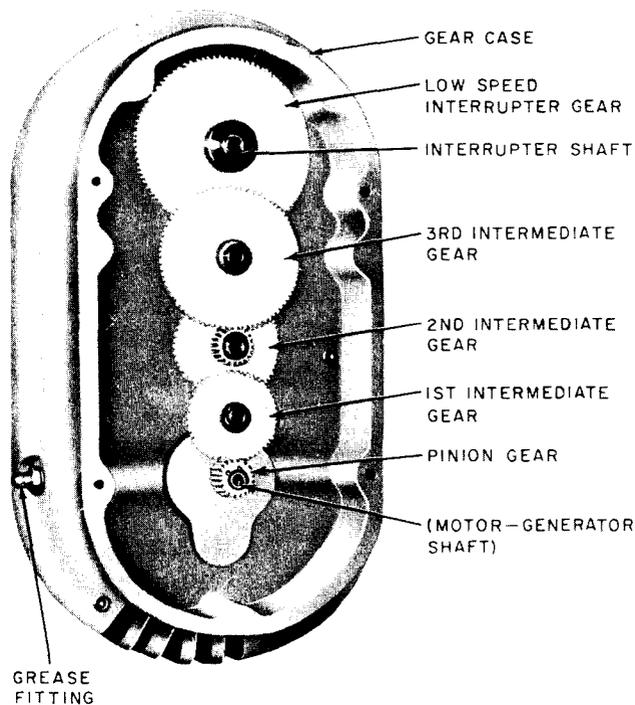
Interrupter Gears—Gear Case Cover Removed—Tech Systems Company (formerly Electric Specialty Company)
